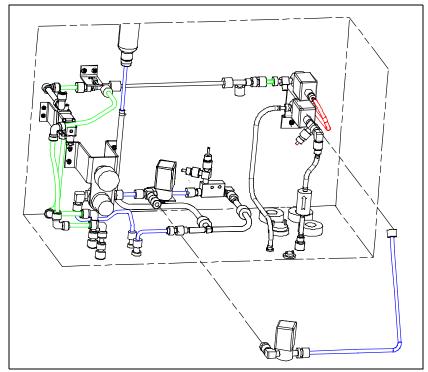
Solenoid Valve D/Tubing Assembly Installation
